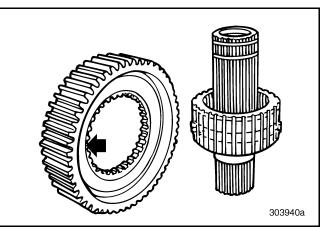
Removing Lo-Range Gear from Hub (T313L/T318L Shown)
